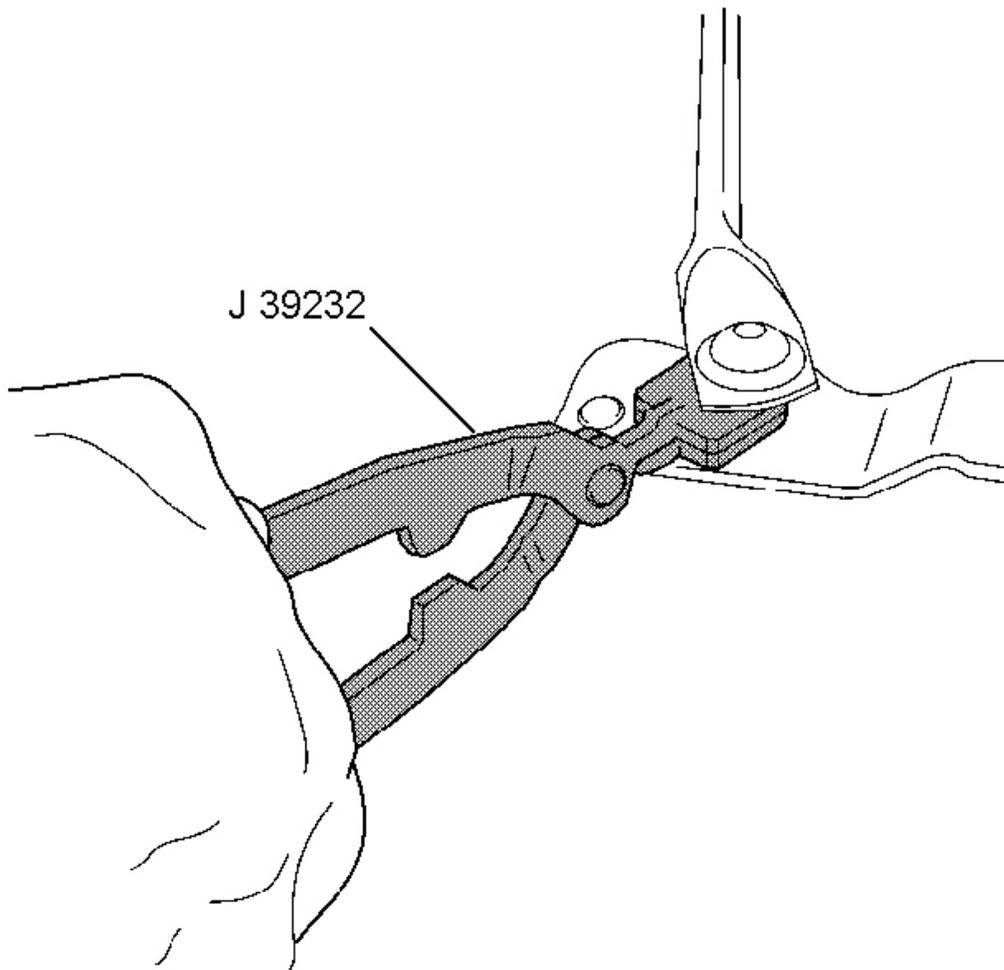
Disconnecting Wiper Transmission From Wiper Motor Crank Arm
